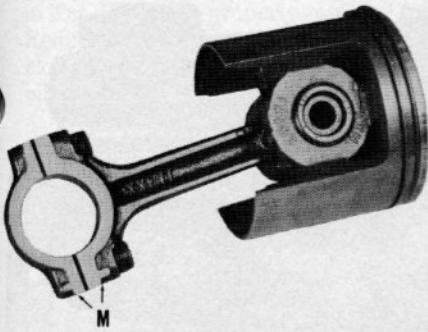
Alignment marks (M) on rod must match and arrow adjacent to "EXH" on piston pin boss must point towards exhaust port for proper installation of piston and connecting rod.
